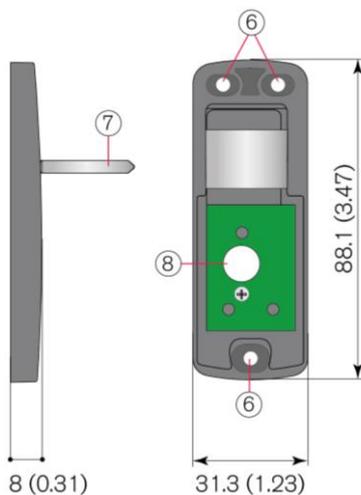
Dimensions of the GAT NET.Lock BoltSet 7120
